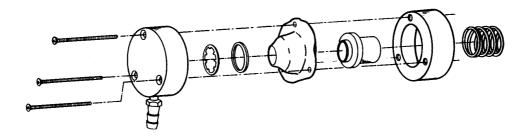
OXYGEN INPUT VALVE ASSEMBLY
